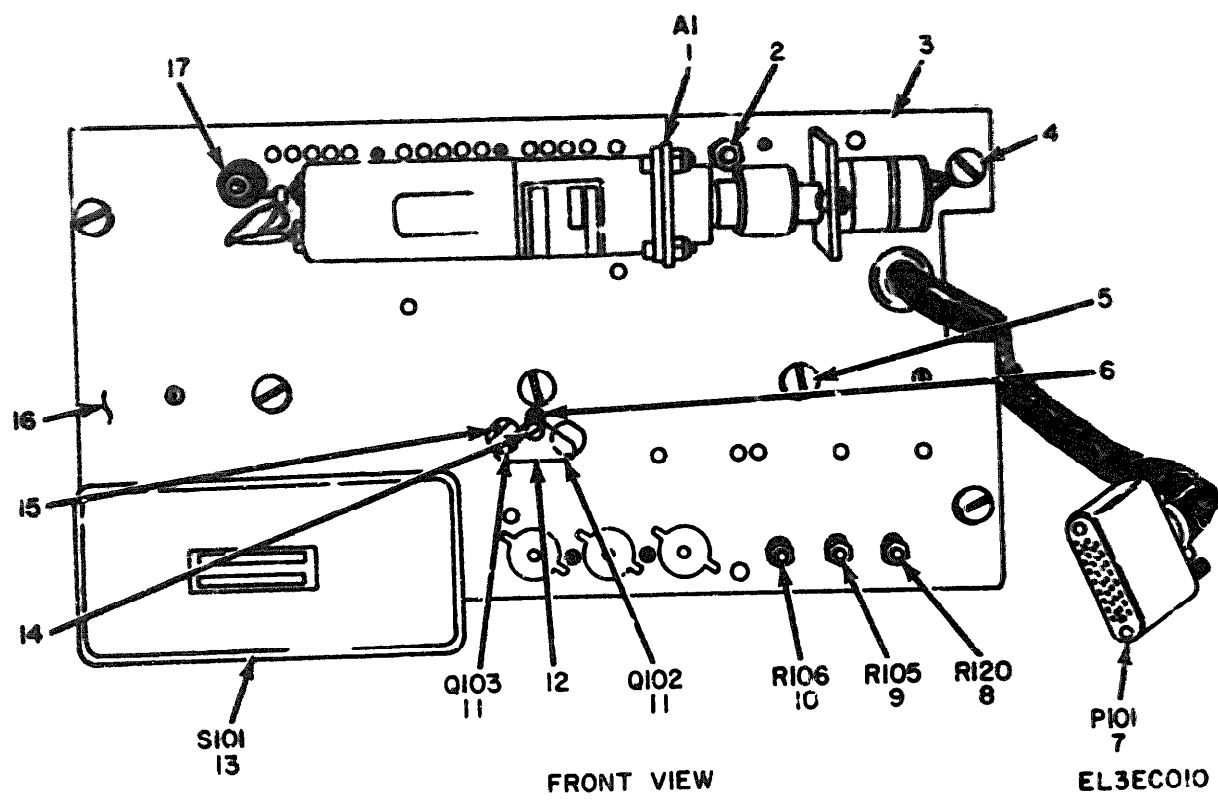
Bracket and Component Assembly (A1A1A6) (Sheet 1 of 2).
